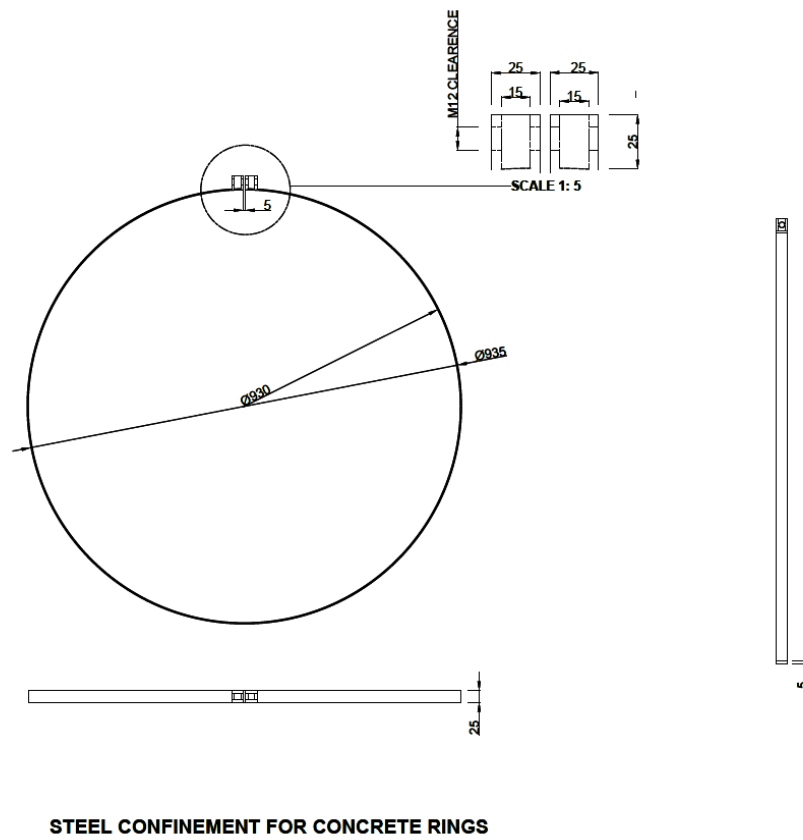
AUTOCAD<sup>®</sup> drawing of the steel confinement band (mm)
